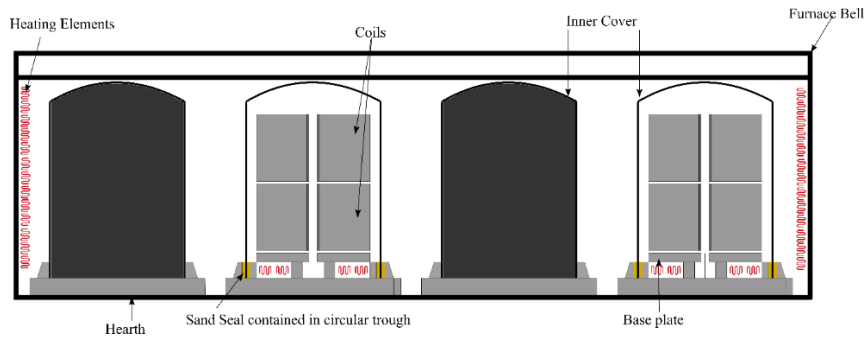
A schematic drawing of a cross-section of an HTCA furnace at Orb Steelworks.
